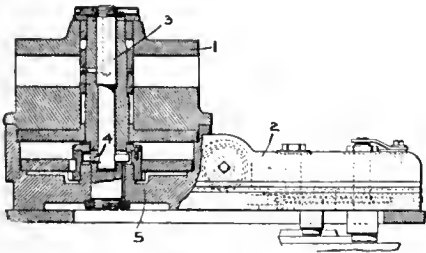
CLAMPING DEVICE FOR TURRET. POTTER & JOHNSTON MACHINE CO.
